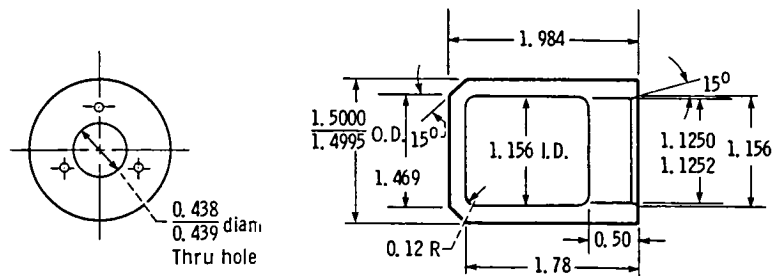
Journal for compliant foil gas bearing. Material, A286 stainless steel. Dimensions are in inches.
